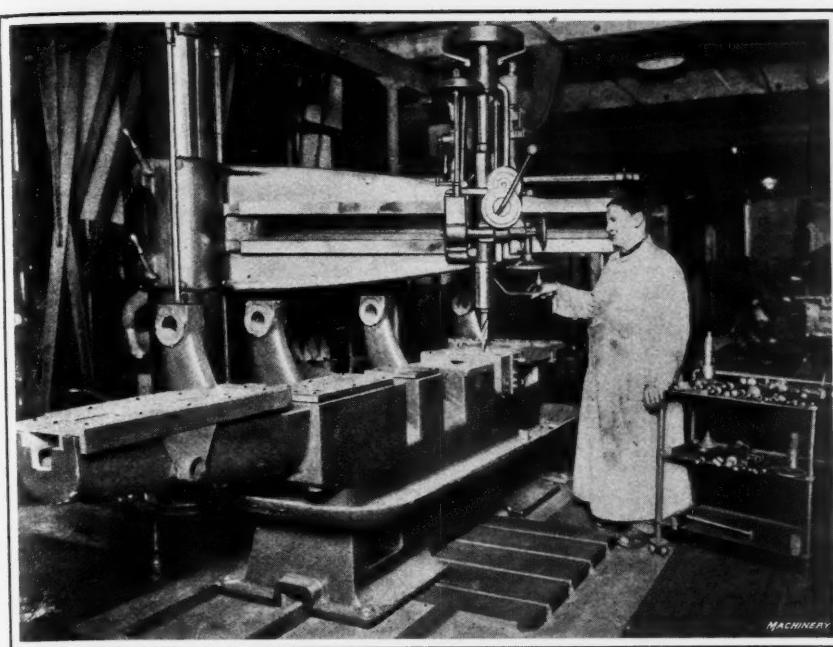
Radial Drilling Machine built by Cincinnati Bickford Tool Co. engaged in drilling Bed of Cleveland Automatic
